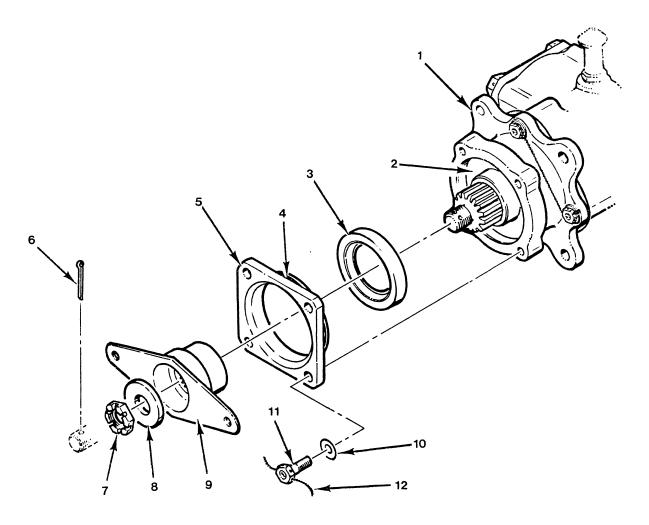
A TAIL ROTOR GEARBOX INPUT SHAFT SEAL REPLACEMENT
